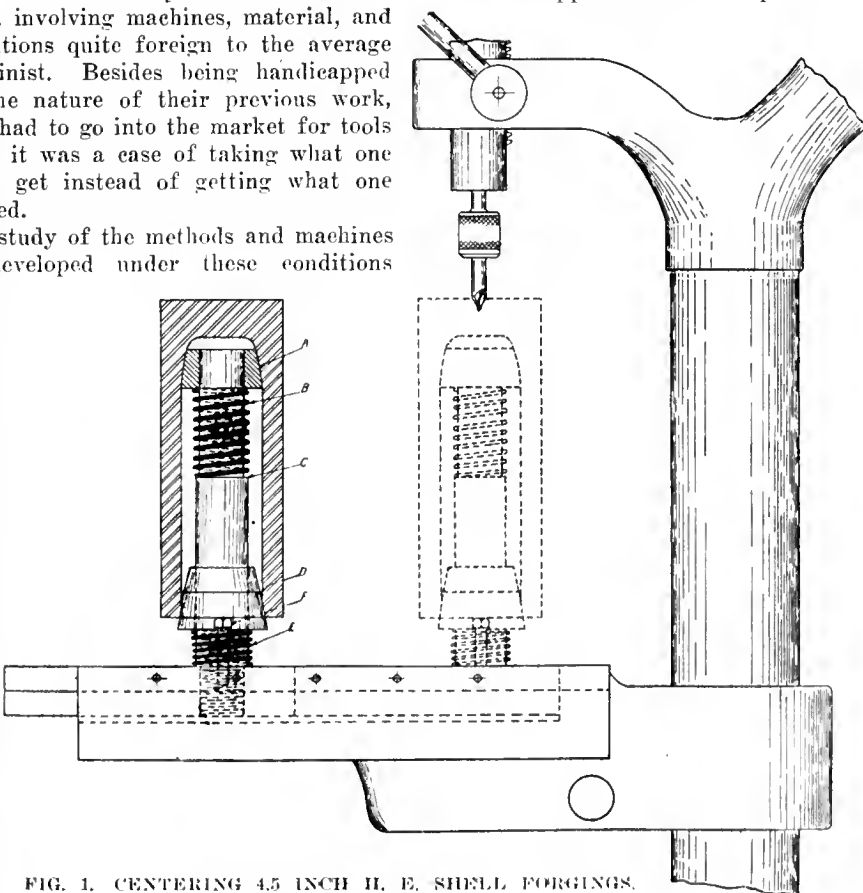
CENTERING 4.5 INCH H. E. SHELL FORGINGS.
